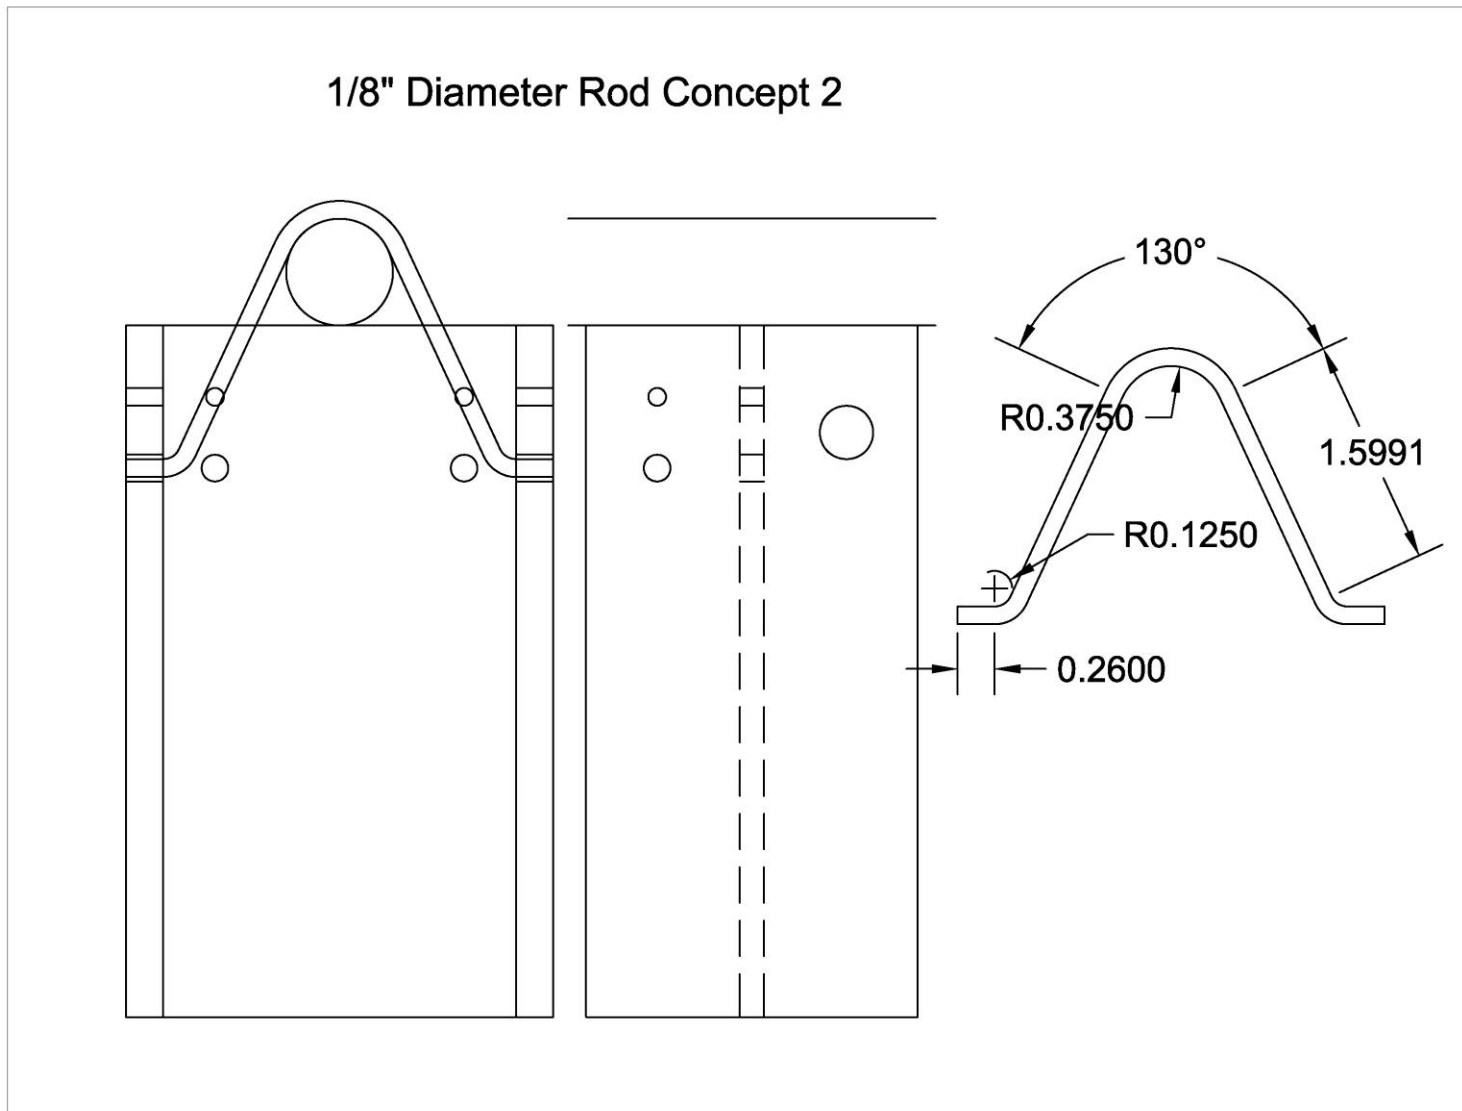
1/8 in. (3.2 mm) Diameter, Squeeze-In-Place Curved Rod Detail
